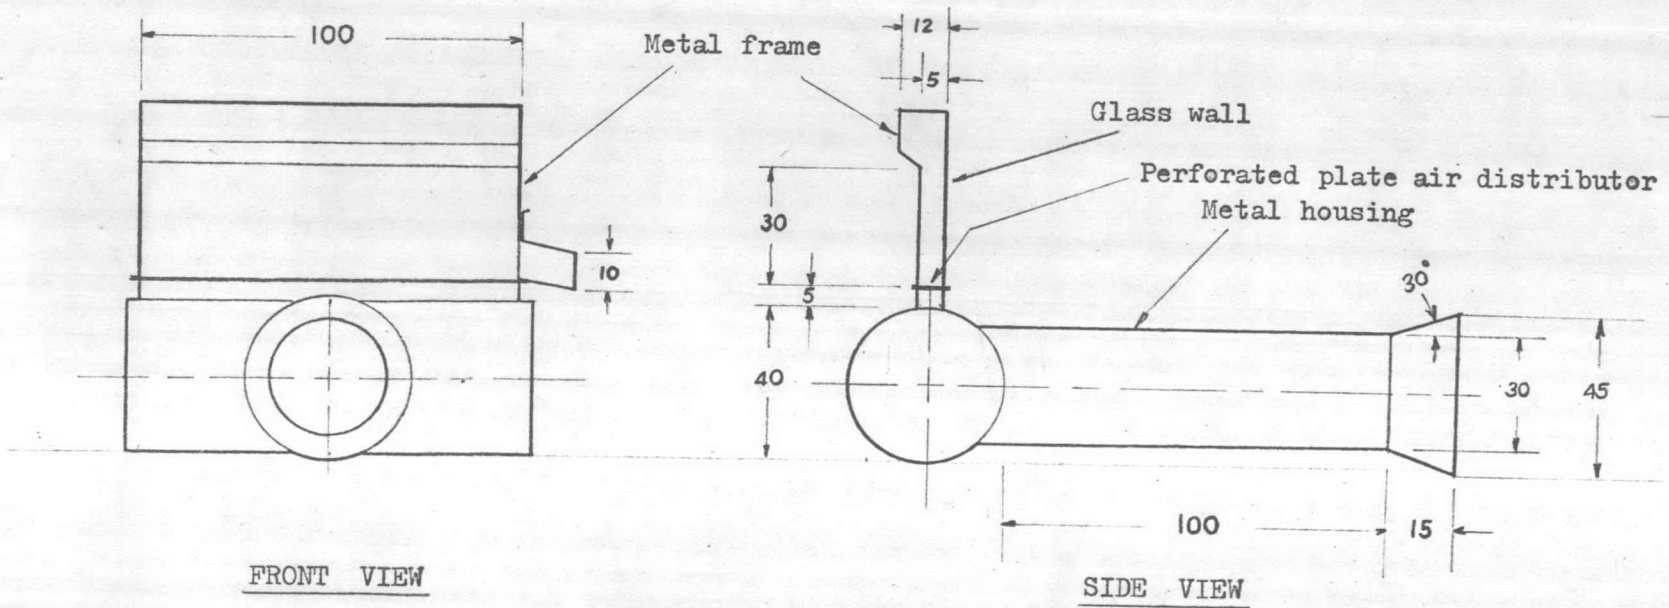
DESIGN OF FLUIDIZING AIR DISTRIBUTOR
